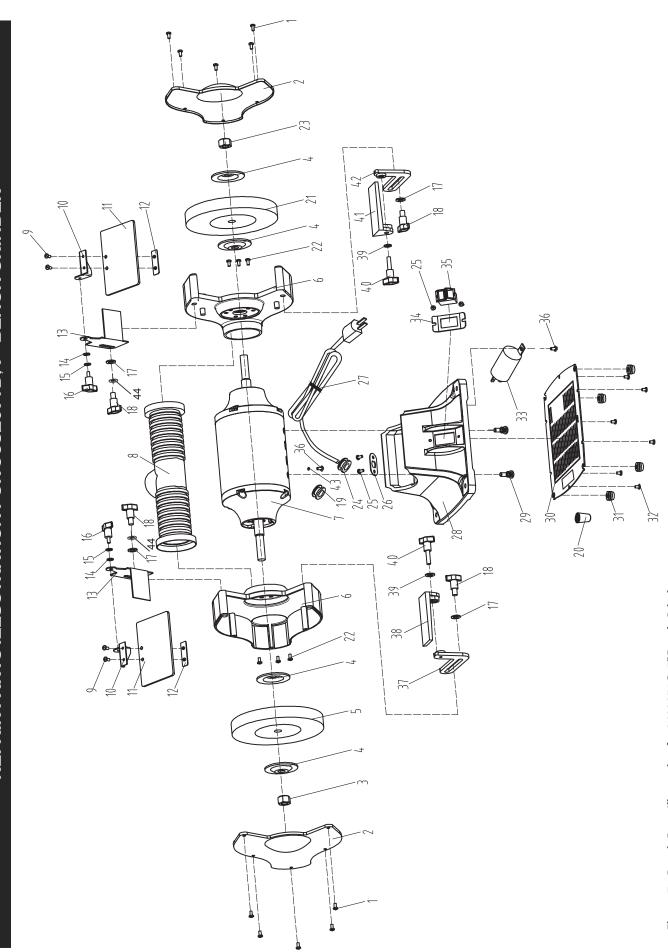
Repair Parts Illustration for 9682071C, 7" Bench Grinder.
